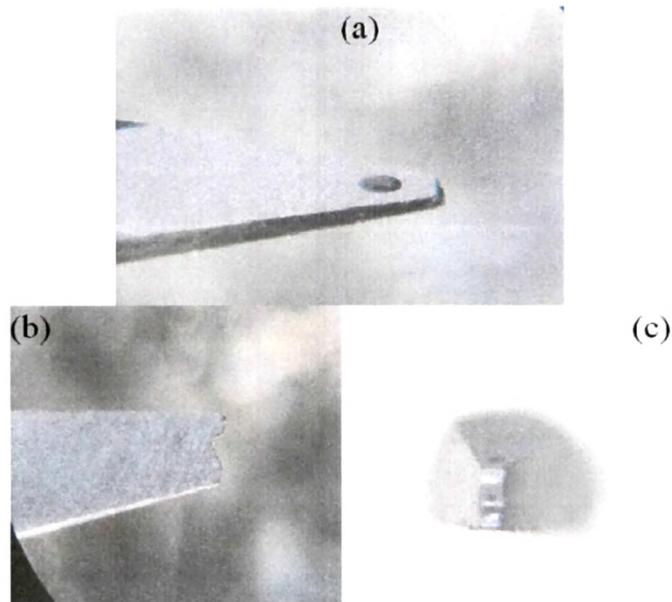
A microscopic view of the wedge used for the bonding. (a) Wedge tip, (b) Side view Wedge tip, (c) Front view Wedge tip
